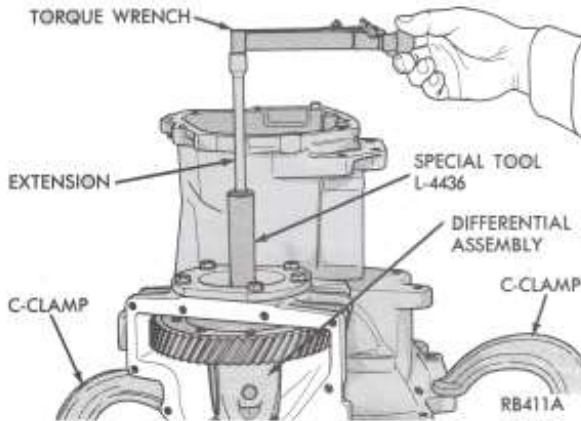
Checking Differential Bearing Turning Torque (A-525 only)
